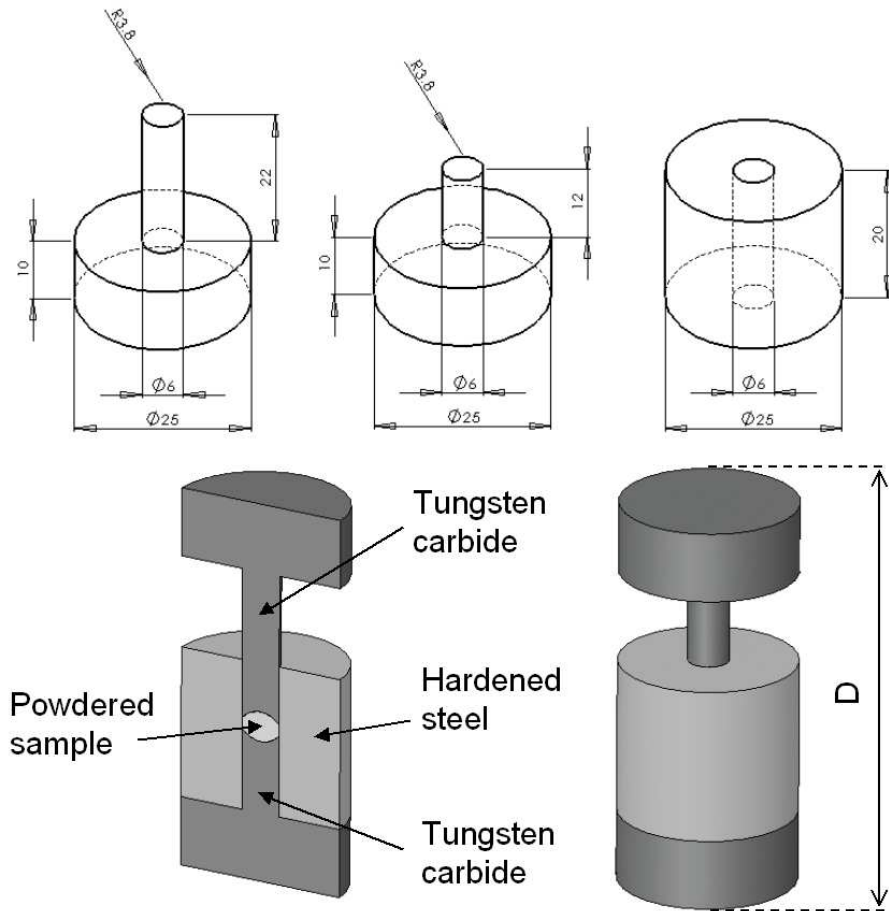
Schematic of the tungsten carbide powder press dies used to form the pre-compressed powder pellet. Dimension units are in mm.
